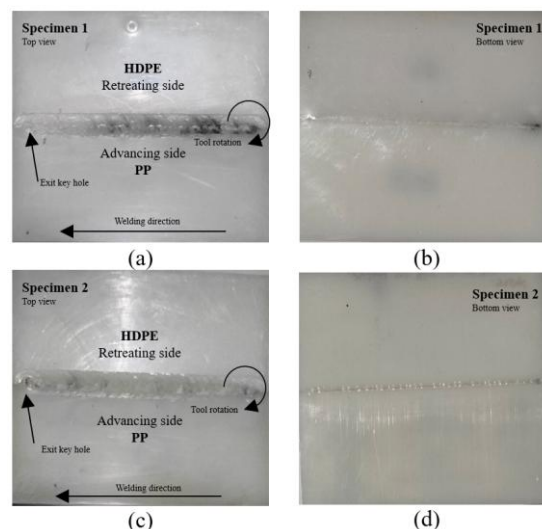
(a) FSW results of conical groove tool specimen 1 top view, (b) FSW results of conical groove tool specimen 1 bottom view, (c) FSW results of conical groove tool specimen 2 top view, (d) FSW results of conical groove tool specimen 2 bottom view
